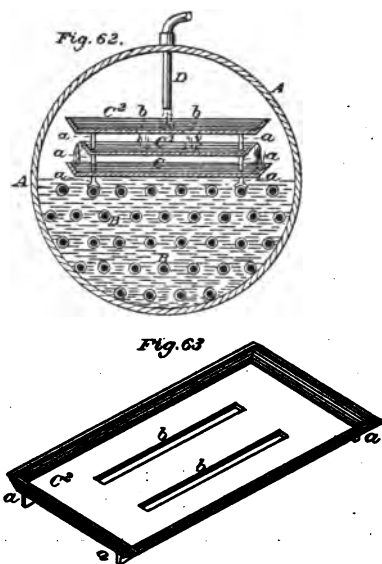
is a cross-section of a boiler, showing Fisk's improvement applied thereto. Fig. 63 is a perspective view of the upper removable pan, which is placed in the boiler.
